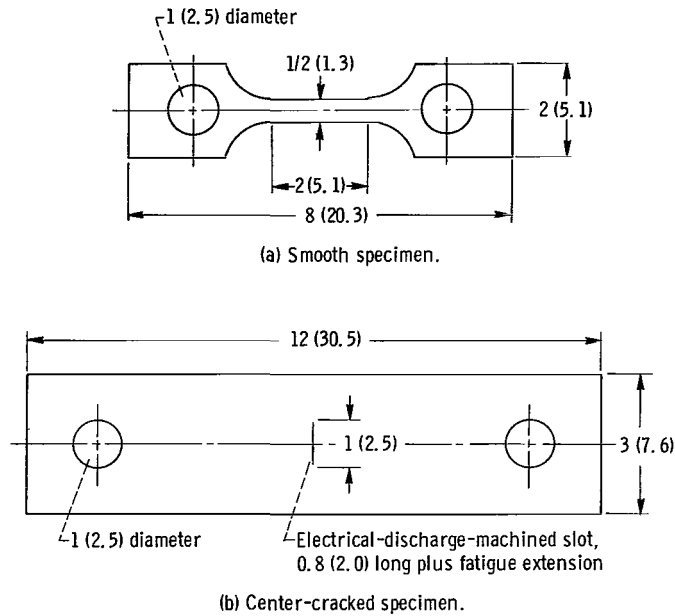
Sheet specimens. (All dimensions in inches (cm).)
